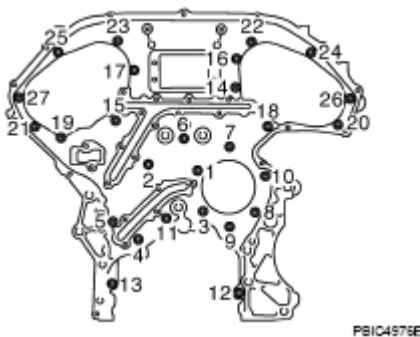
Identifying Mounting Bolts Rear Timing Chain Case Tightening Sequence
